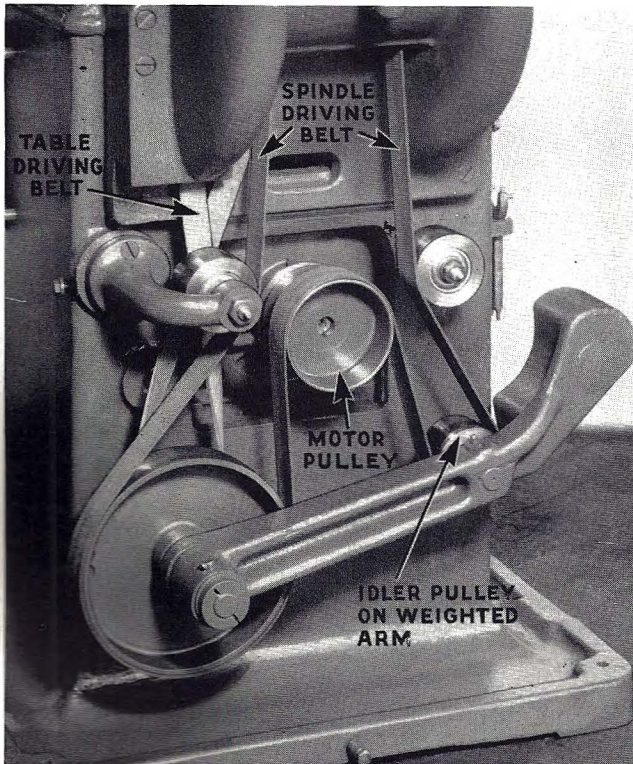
Spindle and table driving motors on machine with motorized spindle (belt guard removed).
